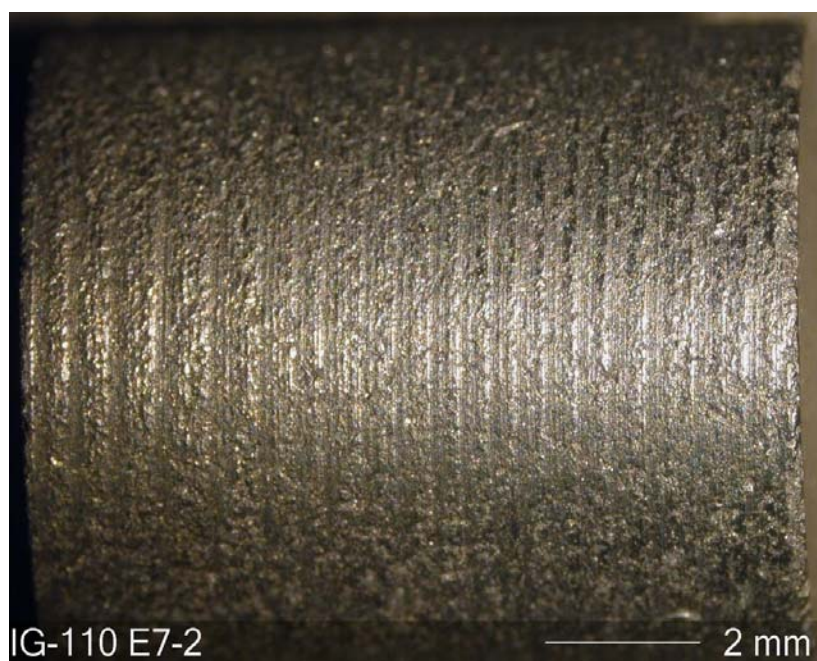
IG-110 specimen E7-2 macrograph showing surface roughness and machining marks
